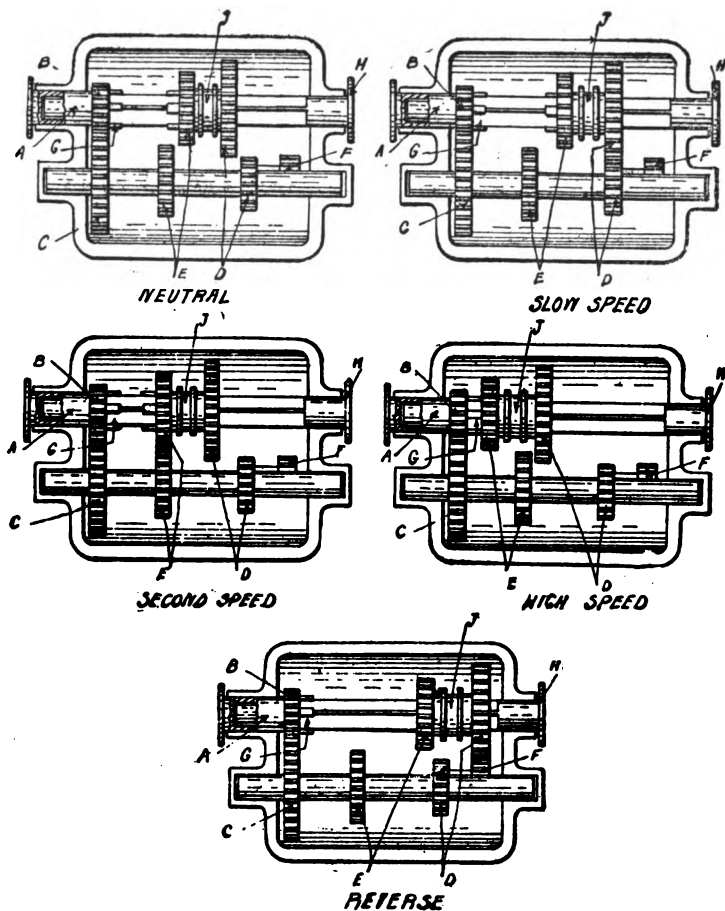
SLIDING GEAR—PROGRESSIVE TYPE. A, Sleeve driven by engine; B, gear on sleeve; C, gear on countershaft; D, low-speed gears; E, second-speed gears; F, idler for reverse; G, clutch for high speed; H, connected to rear wheels; J, gears sliding on square shaft.
